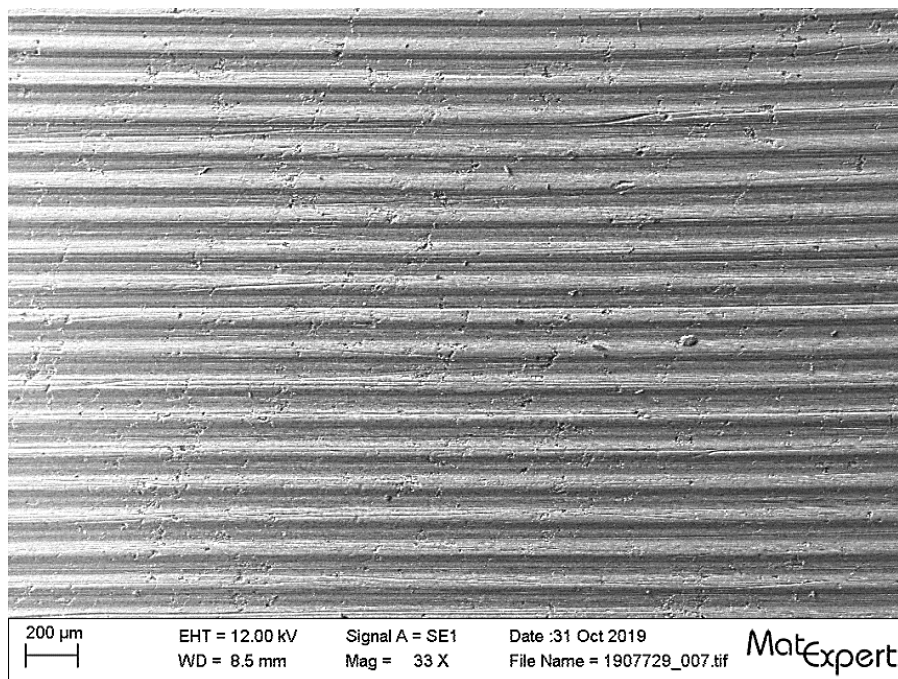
Right engine mount – existing, distinct machining marks (from turned surface).
